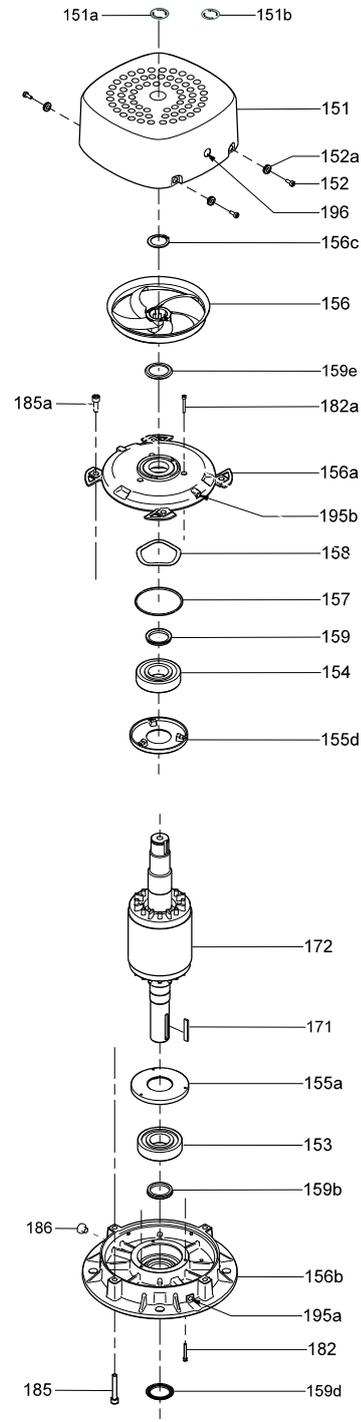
Detail from fig. 29, exploded view of the MGE-F
